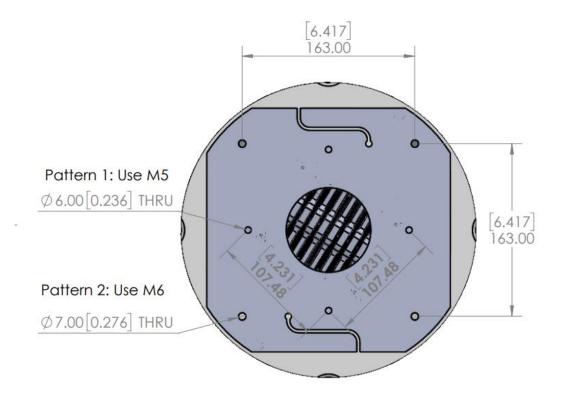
EdgeAntenna baseplate mounting points, center feed through for cables
